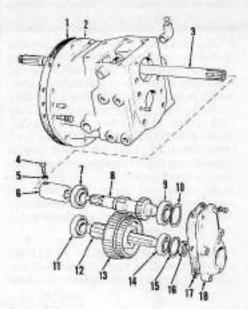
Exploded view of single speed and multi-speed pto essembly for 1390, 1490 and 1690 models showing component parts and their relative positions. Note shaft (8) and gear (13) are different in single speed assemblies, but service procedure is the same.
